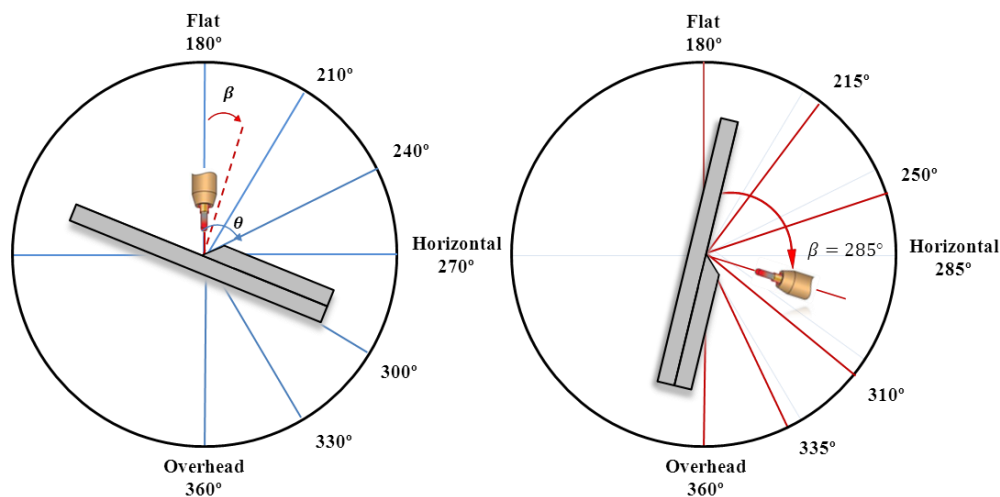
(a) Schematic diagram of welding flat position, (b) Schematic diagram of welding torch angle, horizontal position
